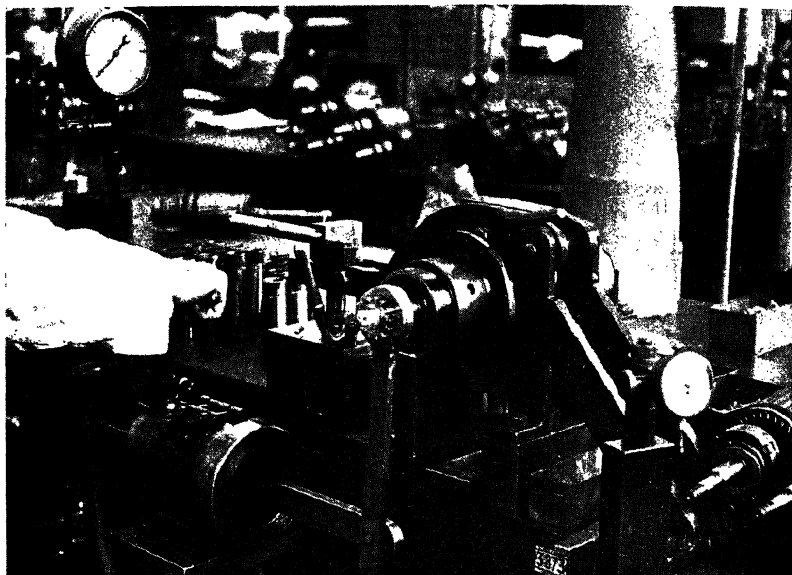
APPARATUS FOR TESTING CLUTCH TORQUE ON AXIAL-TYPE STARTERS
